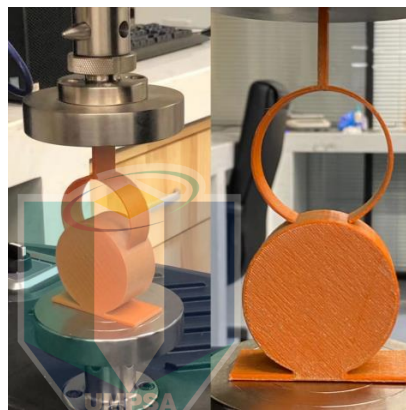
Experimental setup for 3D printed cylindrical snap-fit
